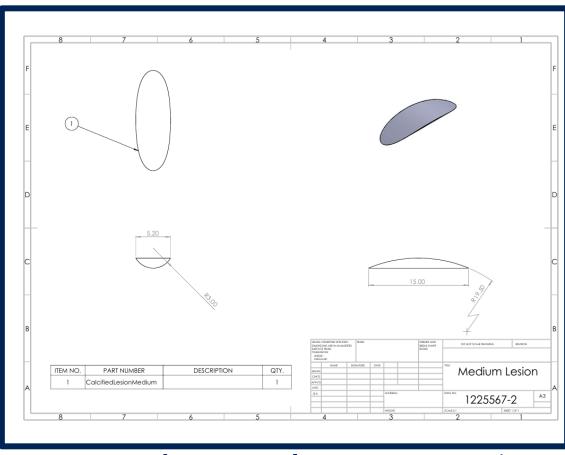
Drawing of Component [PN: 1225567-2 _ Medium Lesion]
